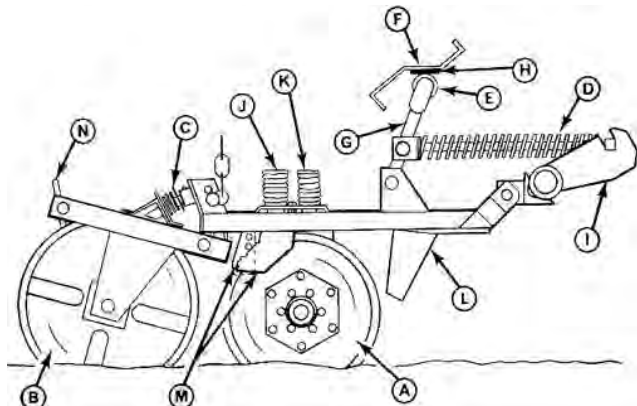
Double Disk Opener and Gauge Wheel Assembly: (A) Disks, (B) Gauge Wheel, (C) Opener Depth Adjusting Hairpin and Washers, (D) Spring, (E) Bearing, (F) Roller Barplate, (G) Roller Bar, (H) Shim Plate, (I) Pressure Adjusting Arm, (J) Fertilizer Drop Tube, (K) Grain Drop Tube, (L) Rock Guard, (M) Disk Scrapers, (N) Gauge Wheel Scraper.
